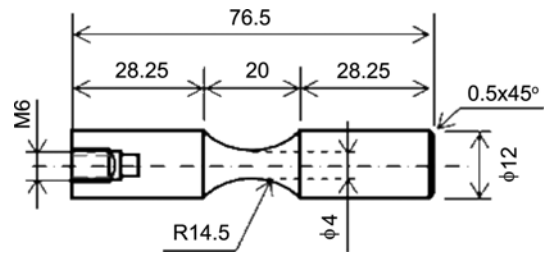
Specimen for ultrasonic fatigue tests. All dimensions are in mm.
